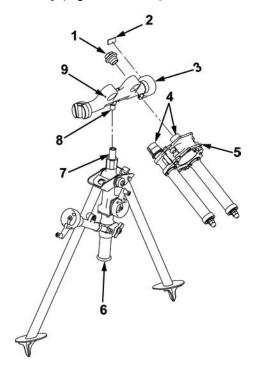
Assembly of Traversing Mechanism and Recoil Mechanism Buffer.
